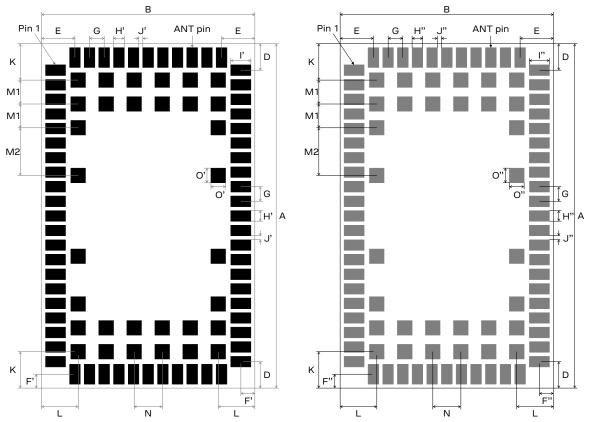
SARA-R4 series modules suggested footprint and paste mask (application board top view)
